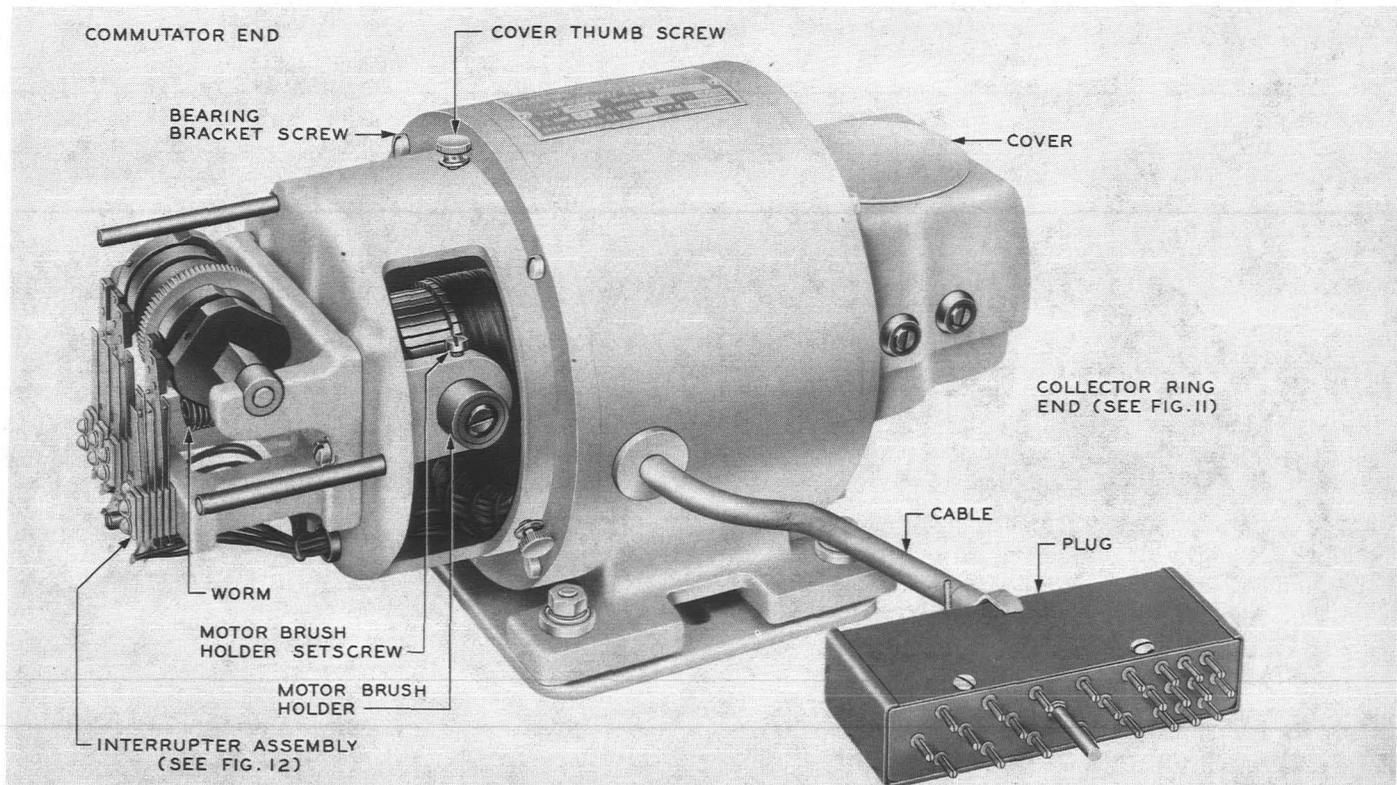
Assembly (Electric Specialty Co KS-5319-04)
